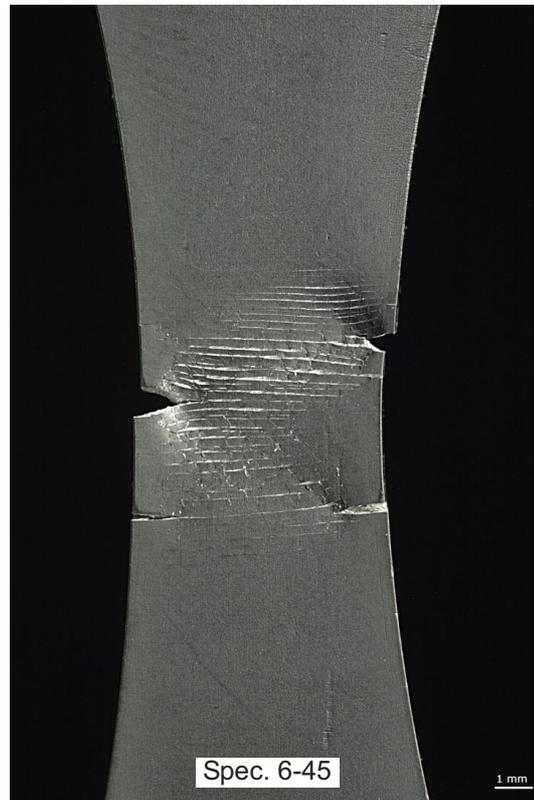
Example of multiple fatigue crack initiation in a DLC coated specimen [Ref. 8]
